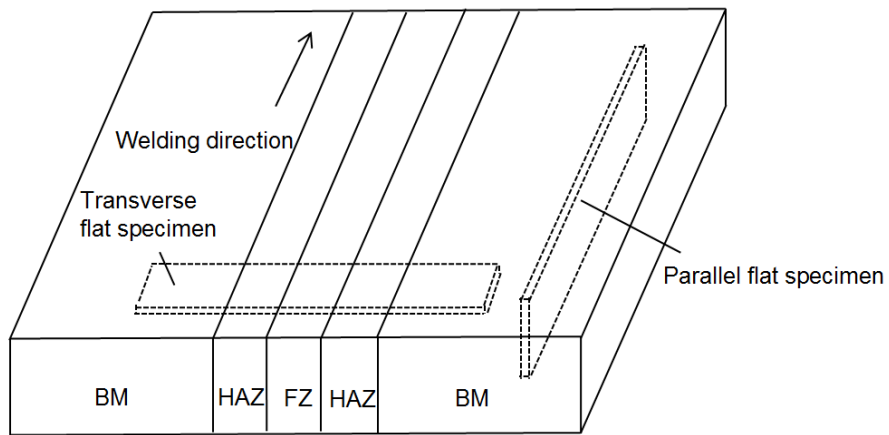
Sketch of laser weld joint and extraction of flat specimens at different regions.
